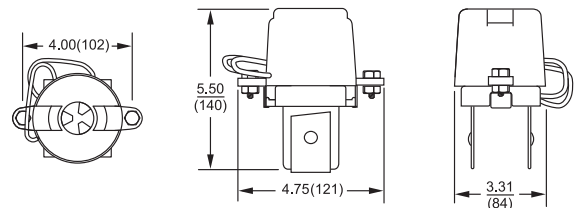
Figure B — Indicator with Attached Sensor. Tie-Wrap Mounting.
